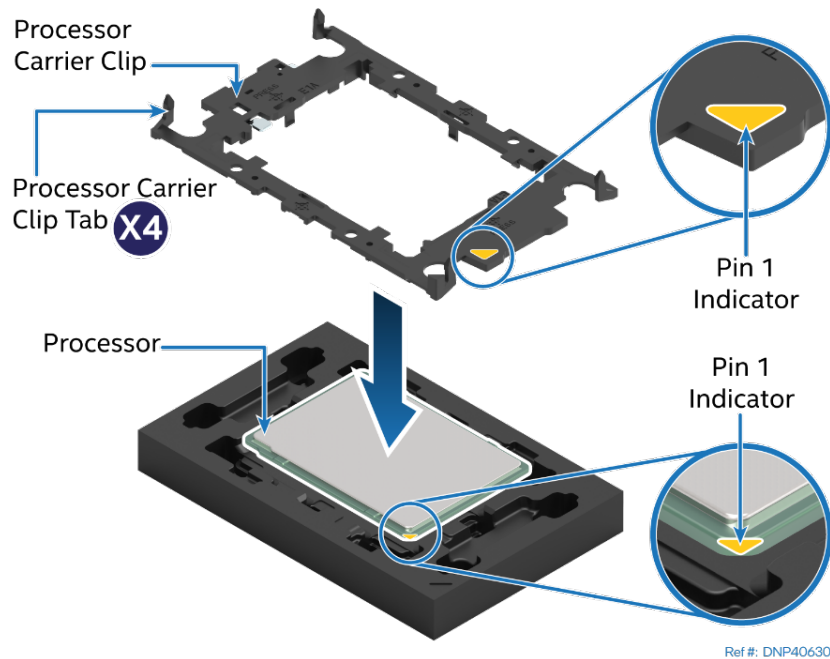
Installing the Processor Carrier Clip onto the Processor – Part 1
